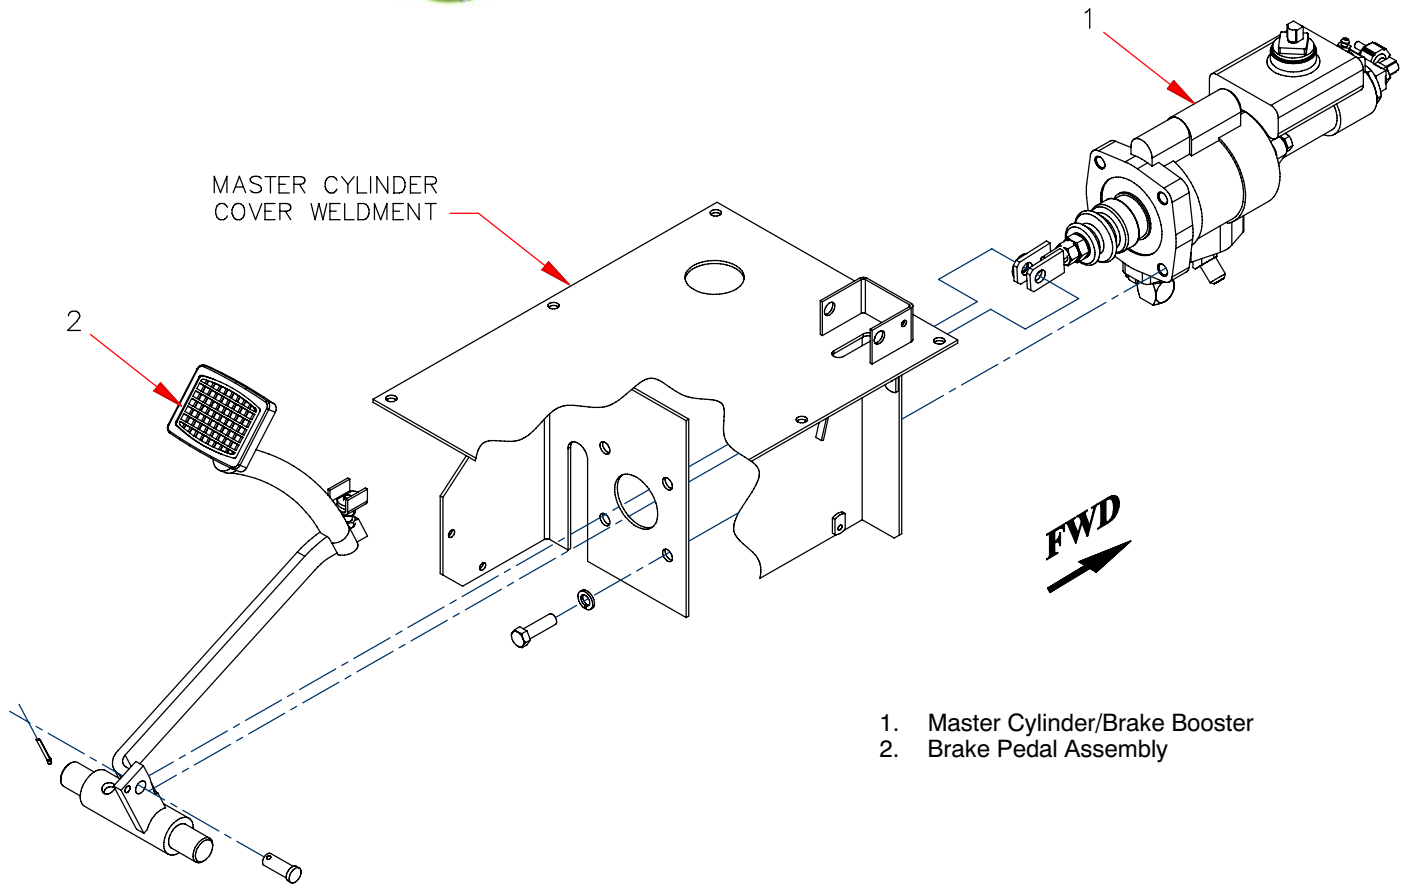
A Master Cylinder/Brake Booster Removal/Installation
